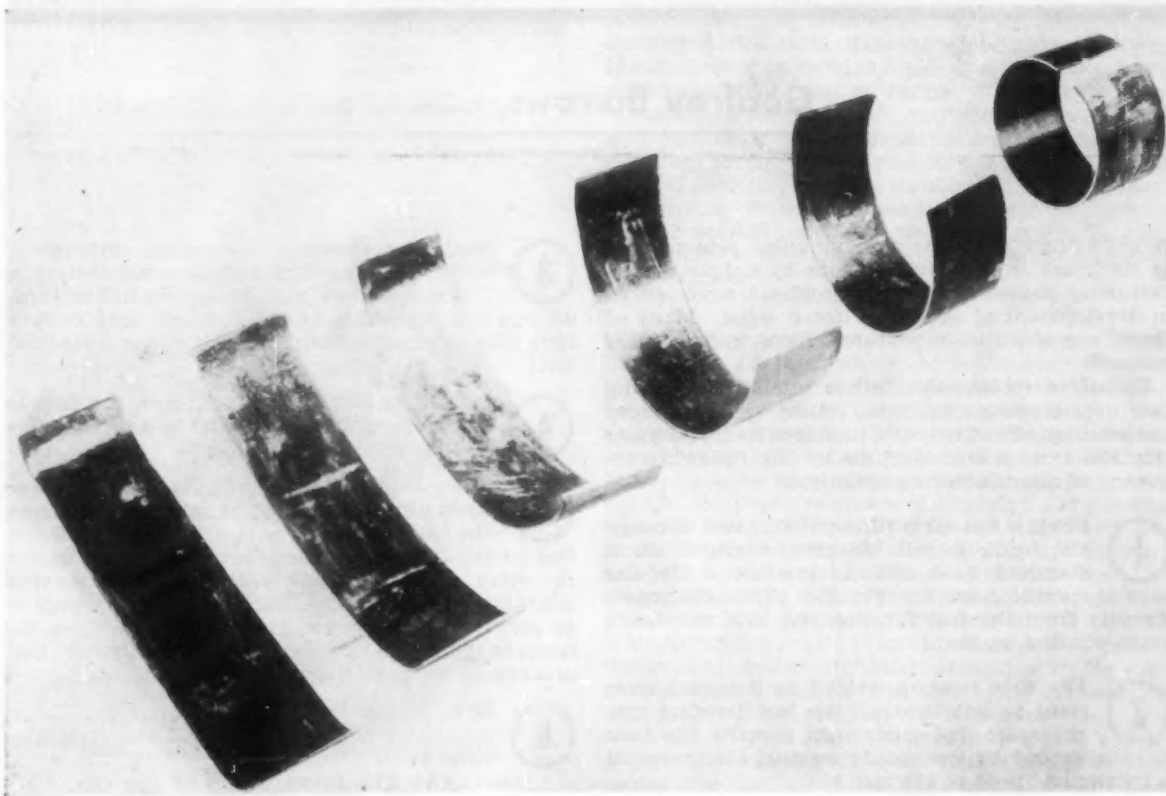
MANUFACTURING BEGINS when a flat strip of steel is passed through six forming mill stations, mounted in a standard tube mill. This passage produces a circular tube of specific diameter. At left are shown the forming rolls; below the transformation of the flat strip of steel as it progresses through each forming mill. (After leaving the last forming roll, the piece passes directly to a resistance seam welding station.)
